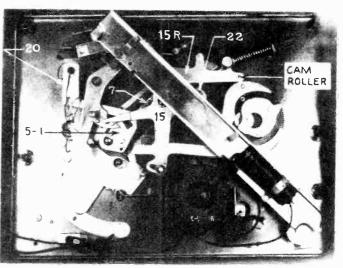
Bottom view corresponding to Fig. 5. The trip finger 7 has shifted trip pawl 22 into tripping position through friction clutch (not shown) on upper side of friction clutch plate 5-1. This is check point No. 3.
